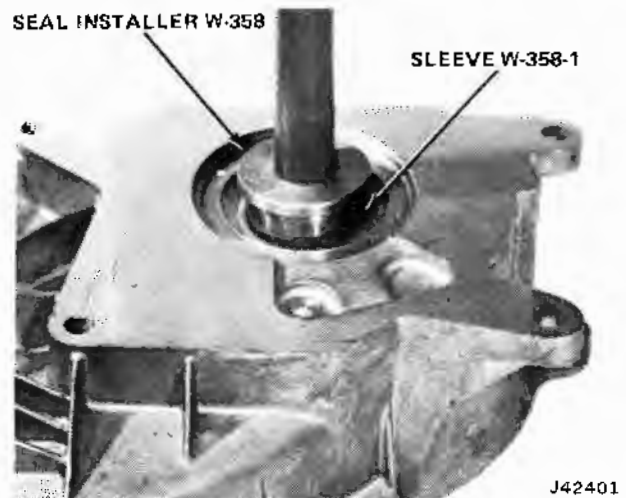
Installing Drive Sprocket Front and Rear Oil Seals
